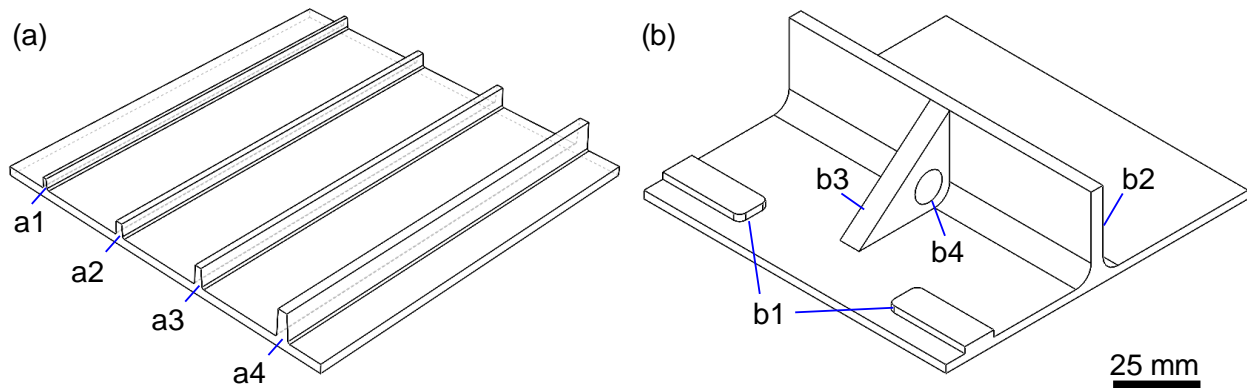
The multi-ribbed (a) and compound T-bracket (b) demonstrator panels.
